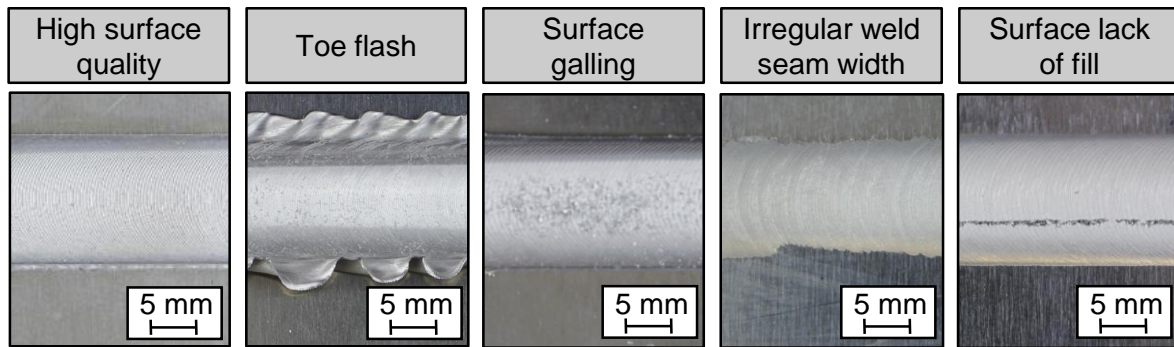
Images of friction stir weld seam surfaces
